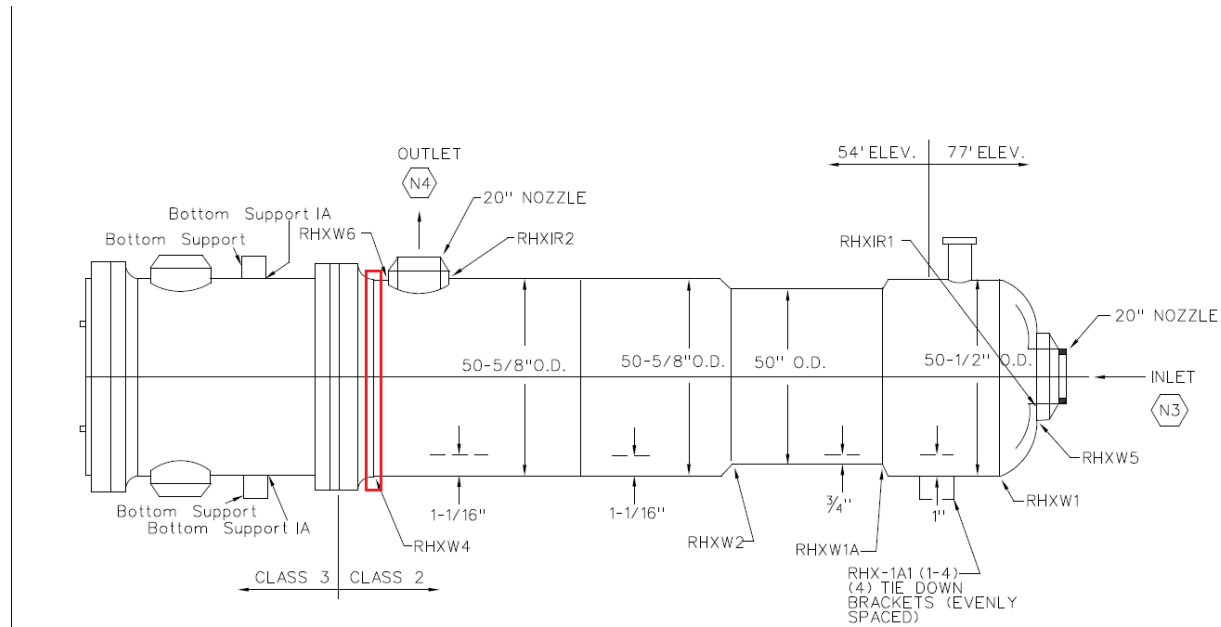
Weld 1-AE-205-RHX-W4 (Extracted from Reference DWG B-1)
